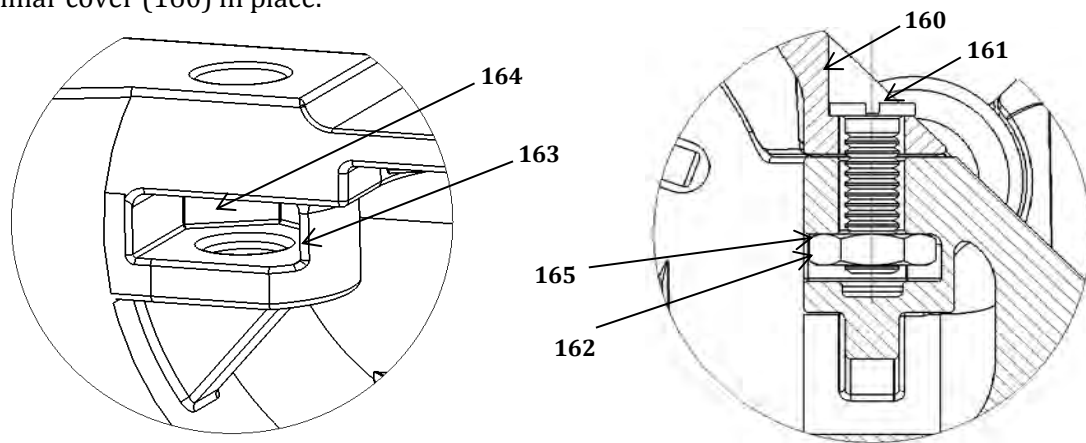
Postero-lateral perspective and lateral section view of a palmar cover fixture
